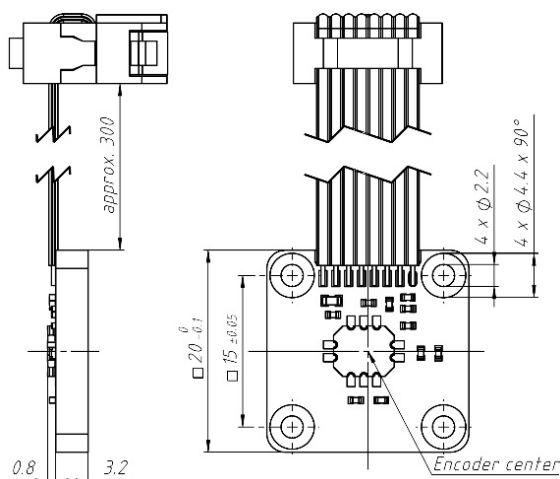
Dimensions (mm) and connector pin-out of encoder on holder type A with flat cable (pitch 1.27 mm) and 8-pin DIN41651 connector.
